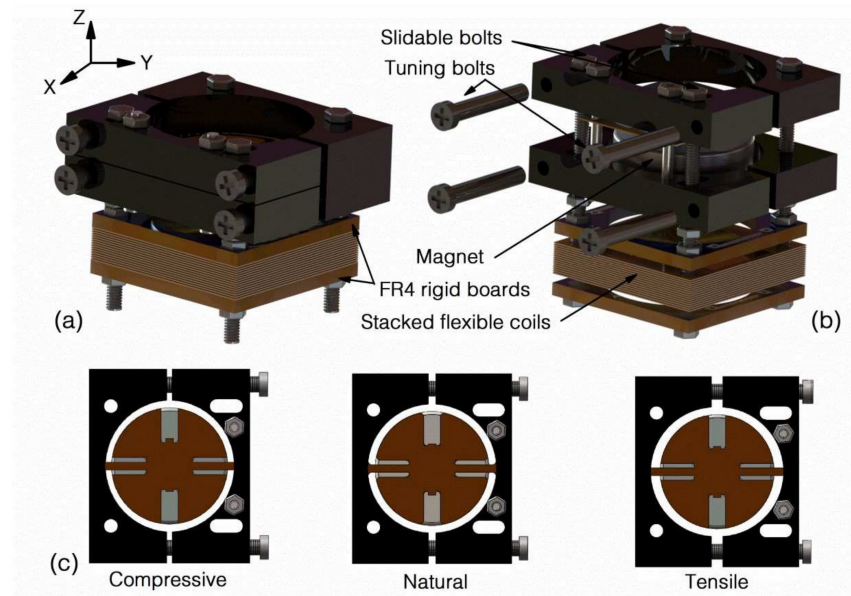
Schematically illustration of (a) the assembled EVEH device; (b) the EVEH in an exploded view; and (c) tuning process of the EVEH.
